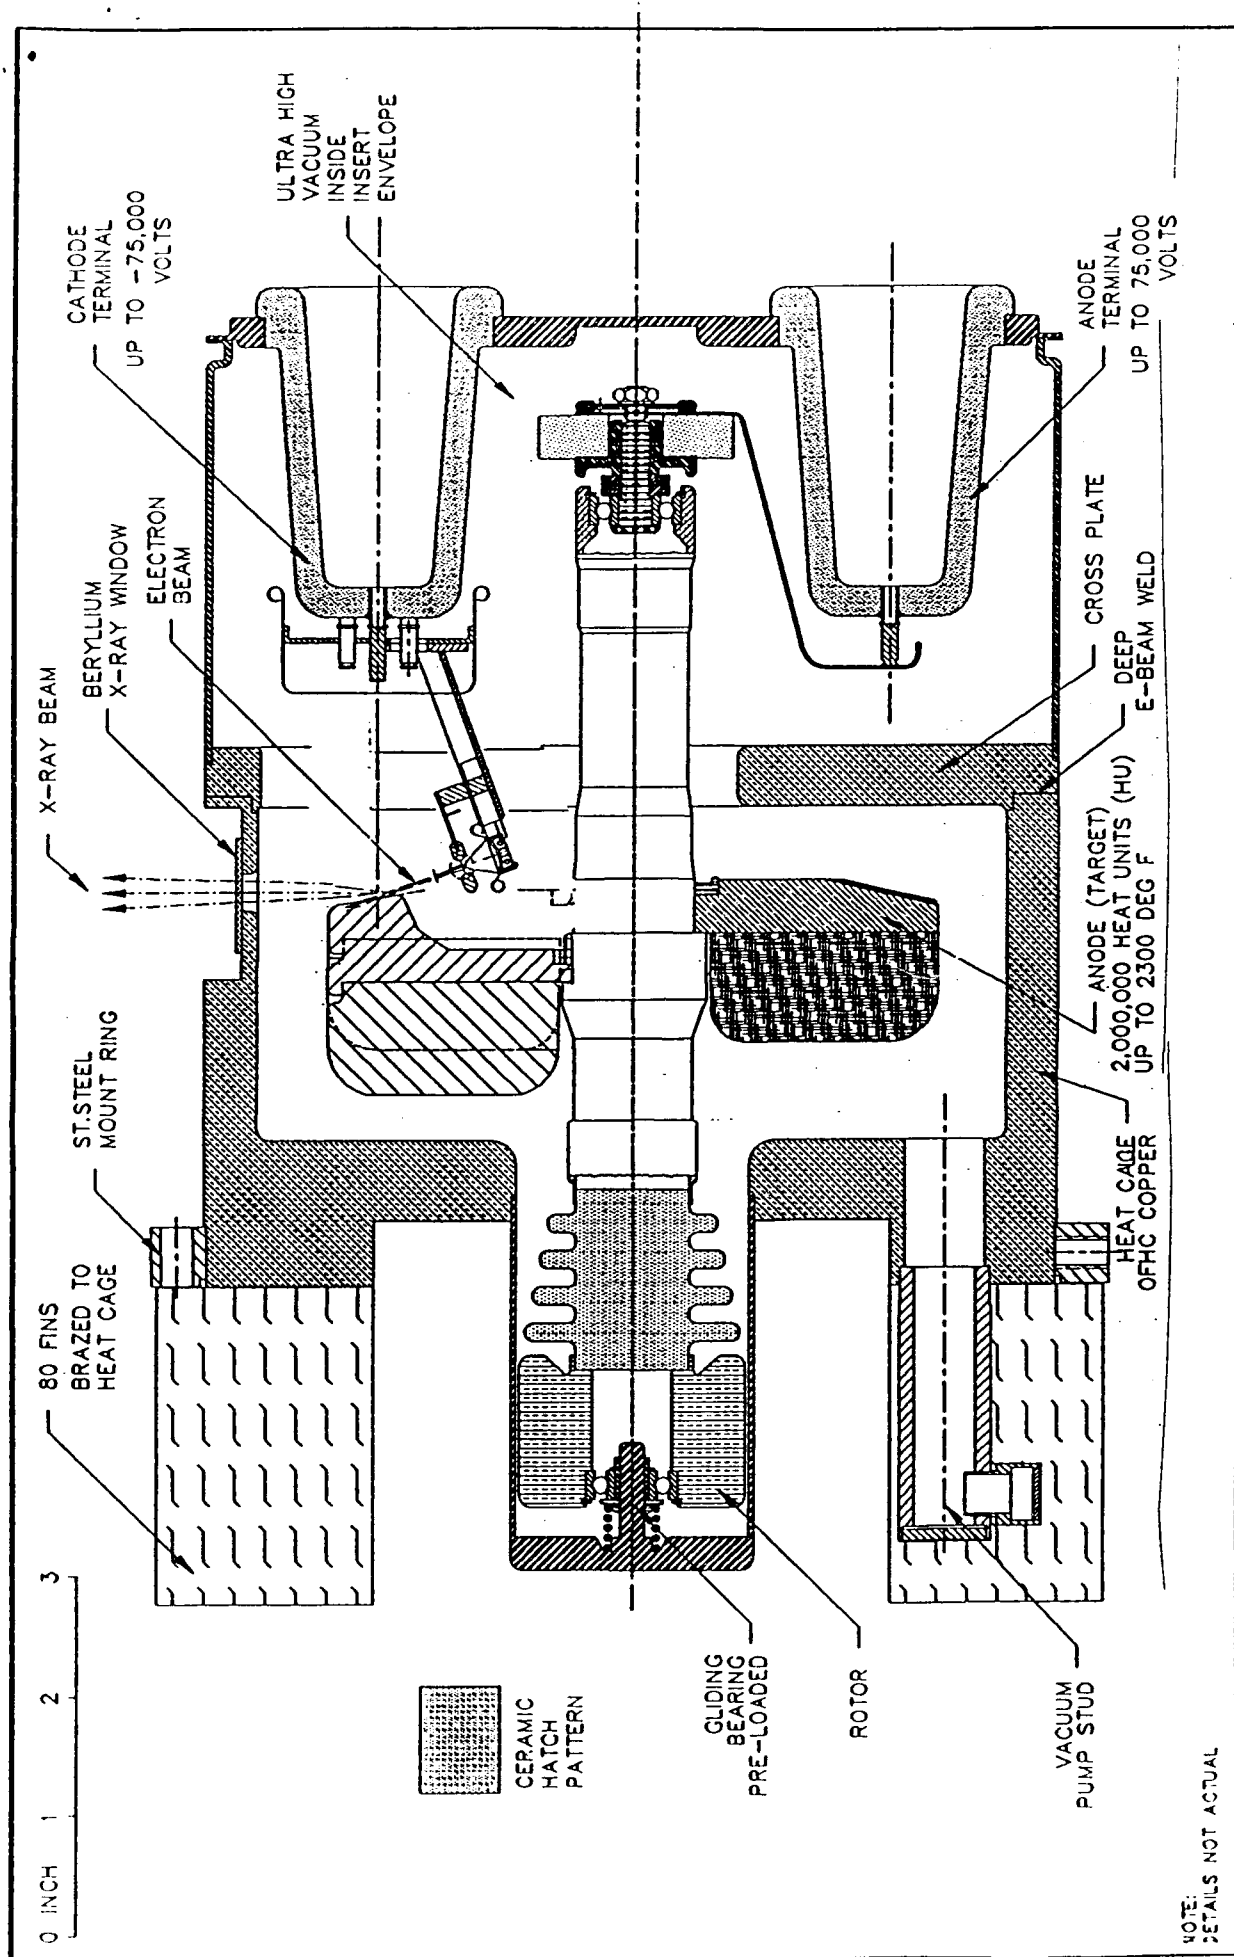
Metal-ceramic rotating anode, air cooled, X-ray tube with EP geometry and initial *g<sub>0</sub>N* electrode design. Page 51
